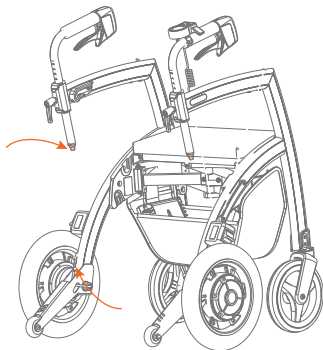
Brake adjustment via the adjustment screws at the top and bottom of the brake cable.
